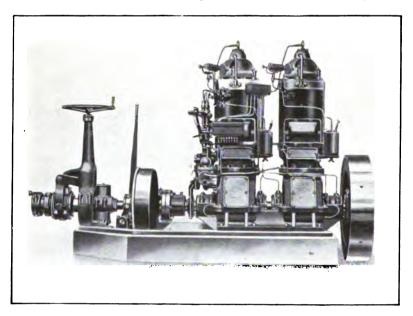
Avance 60 B.H.P. Oil Engine, with reversible propeller blades.
